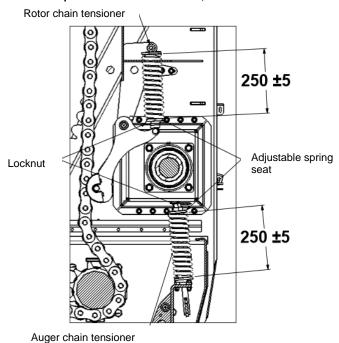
MechFiber380 rotor and auger chain tensioners — 540 RPM
